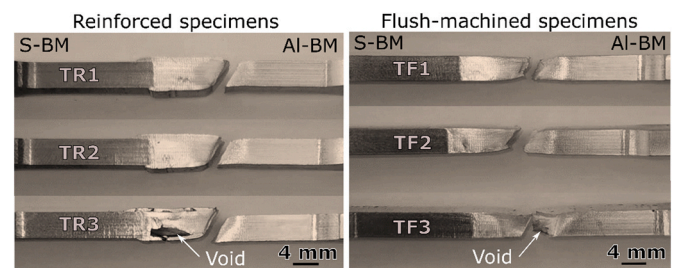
Photographs showing the location of the final fracture in the broken tensile specimens. Note that two of the specimens (TR3 and TF3) contained large visible voids prior to testing.
